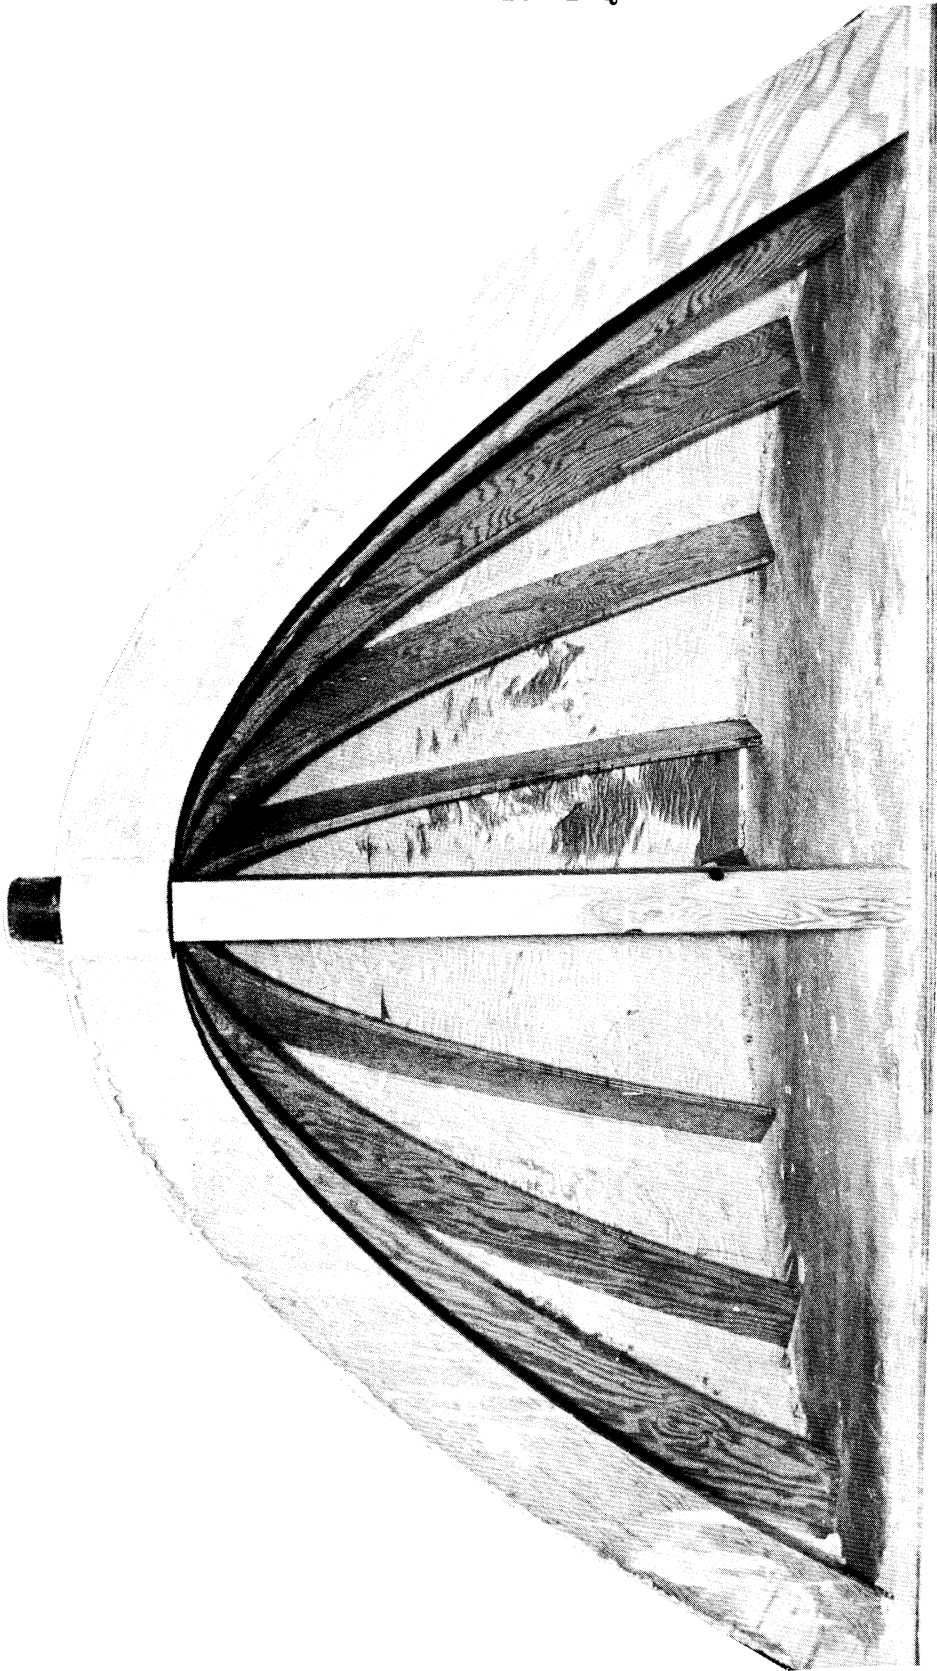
BACK VIEW OF MOLD SHOWING RIB AND SCREEN FRAMEWORK
